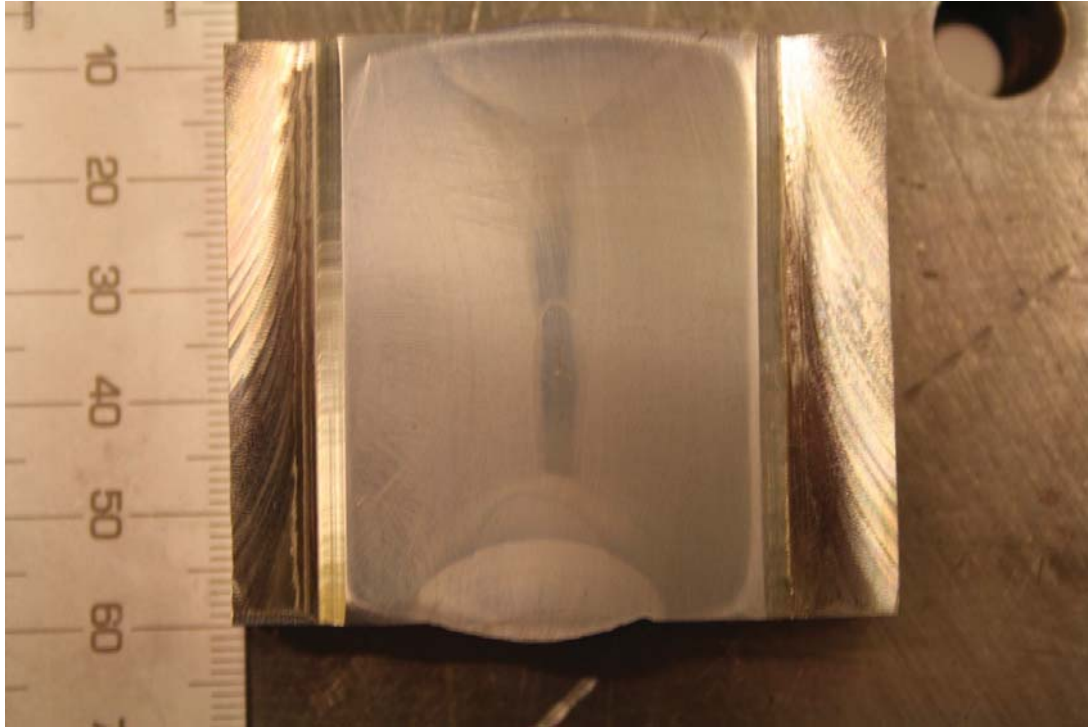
50 mm laser hybrid welded joint, courtesy of LWT/Force Technology
